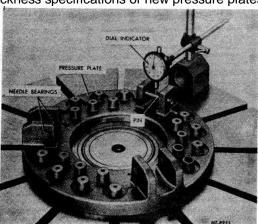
Checking Thickness of Pressure Plate (Dimension "C")
